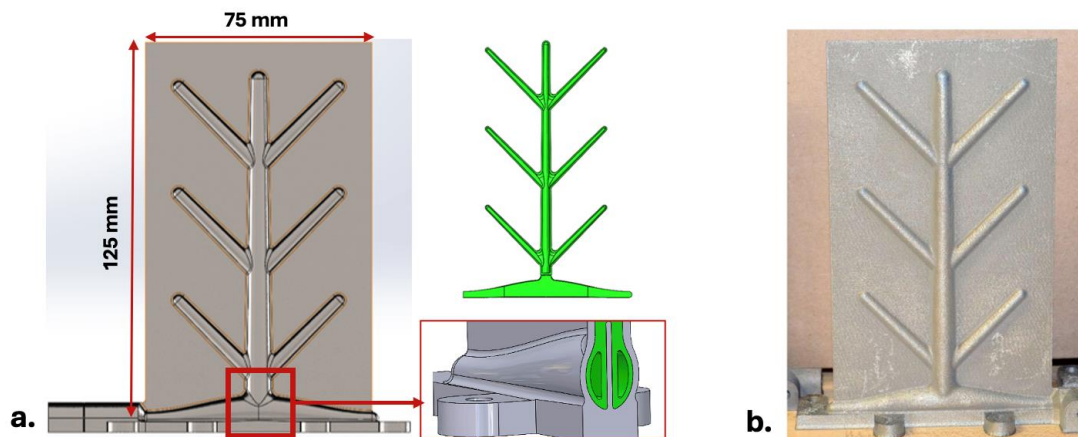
a. CAD drawing of the radiator panel, the wick in green and a cross-sectional view of the evaporator region, b. Produced radiator panel.
